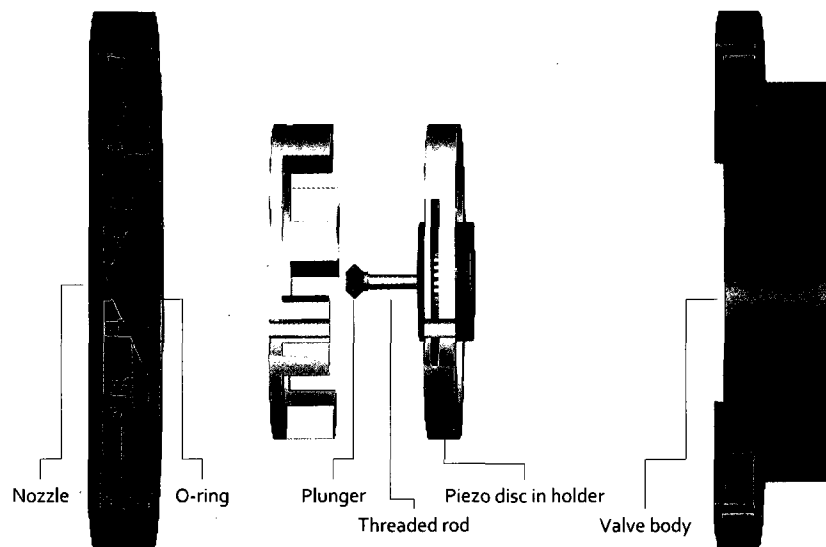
Exploded view of piezo valve based on Proch & Trickl design. The nozzle (0.5 mm diameter) is sealed when the brass plunger is pushed up against the o-ring. The threaded rod length can be adjusted using a lock nut against the piezo disc holder, so that the plunger seals against the o-ring when the piezo is discharged, but opens when the piezo is charged to -1000 volts ( $\approx 100 \mu\text{m}$  displacement). The interior of the valve body can be pressurized up to at least 10 atmospheres; electrical and gas feedthroughs are placed on the rear of the valve body.
